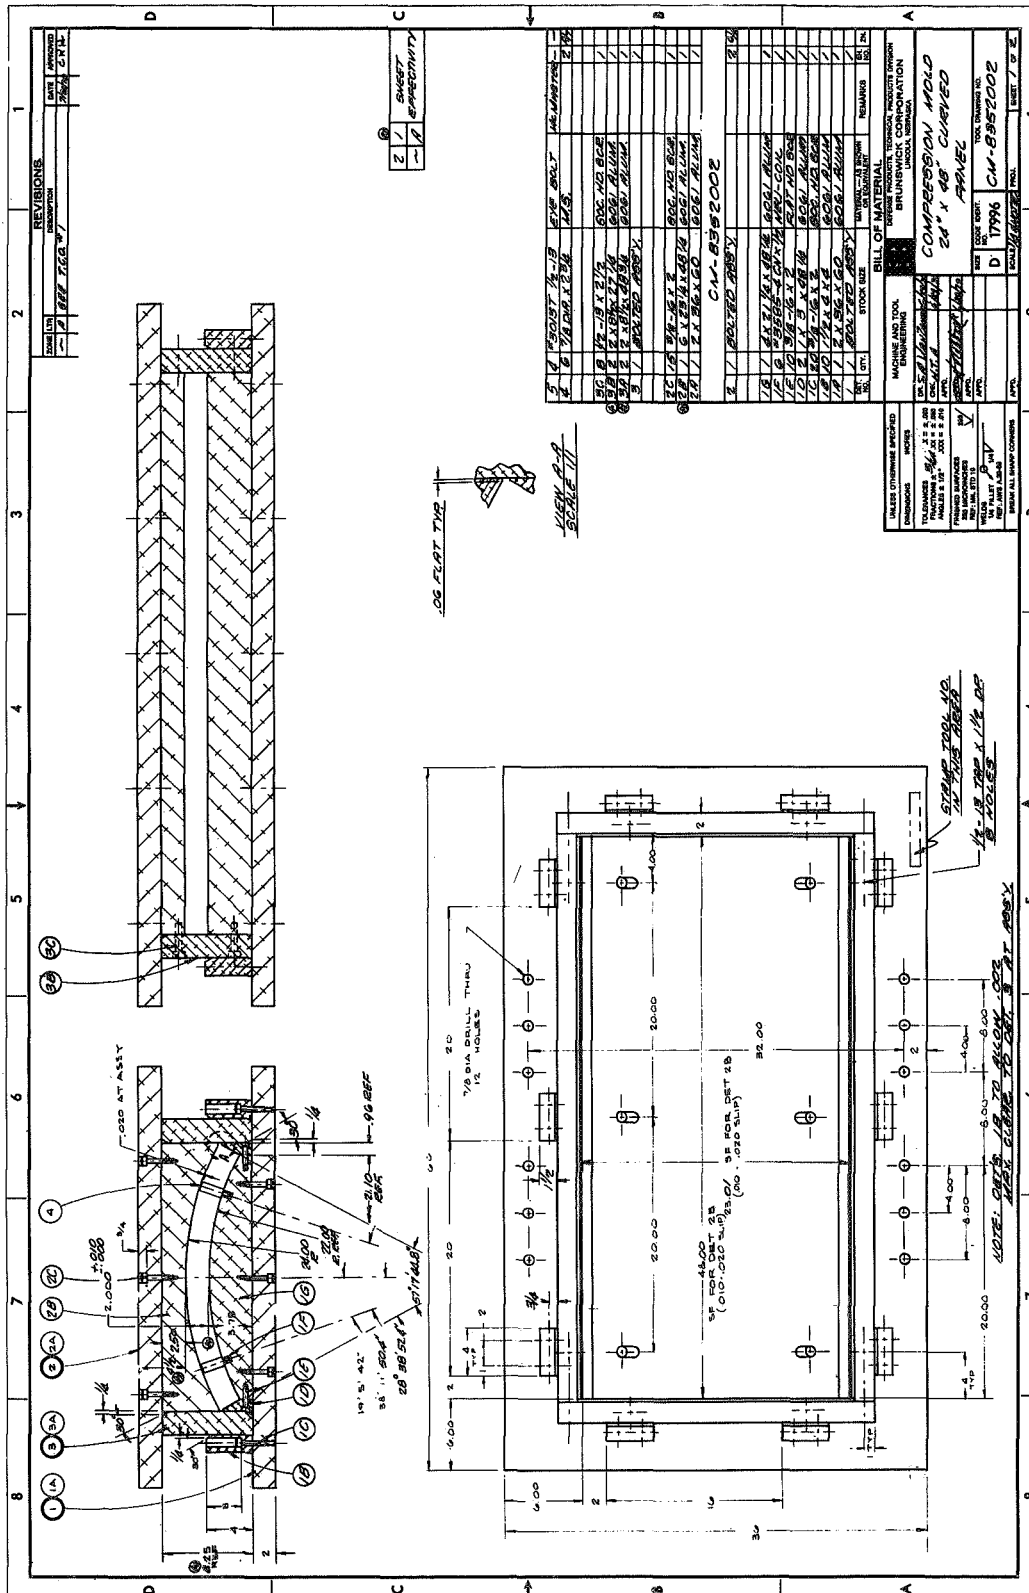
COMPRESSOR MOLD DRAWING 24" X 48" PANEL
